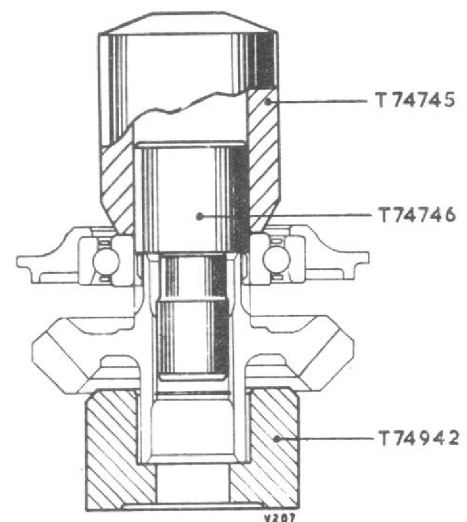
Pressing the bearing and housing on to the upper vertical drive
